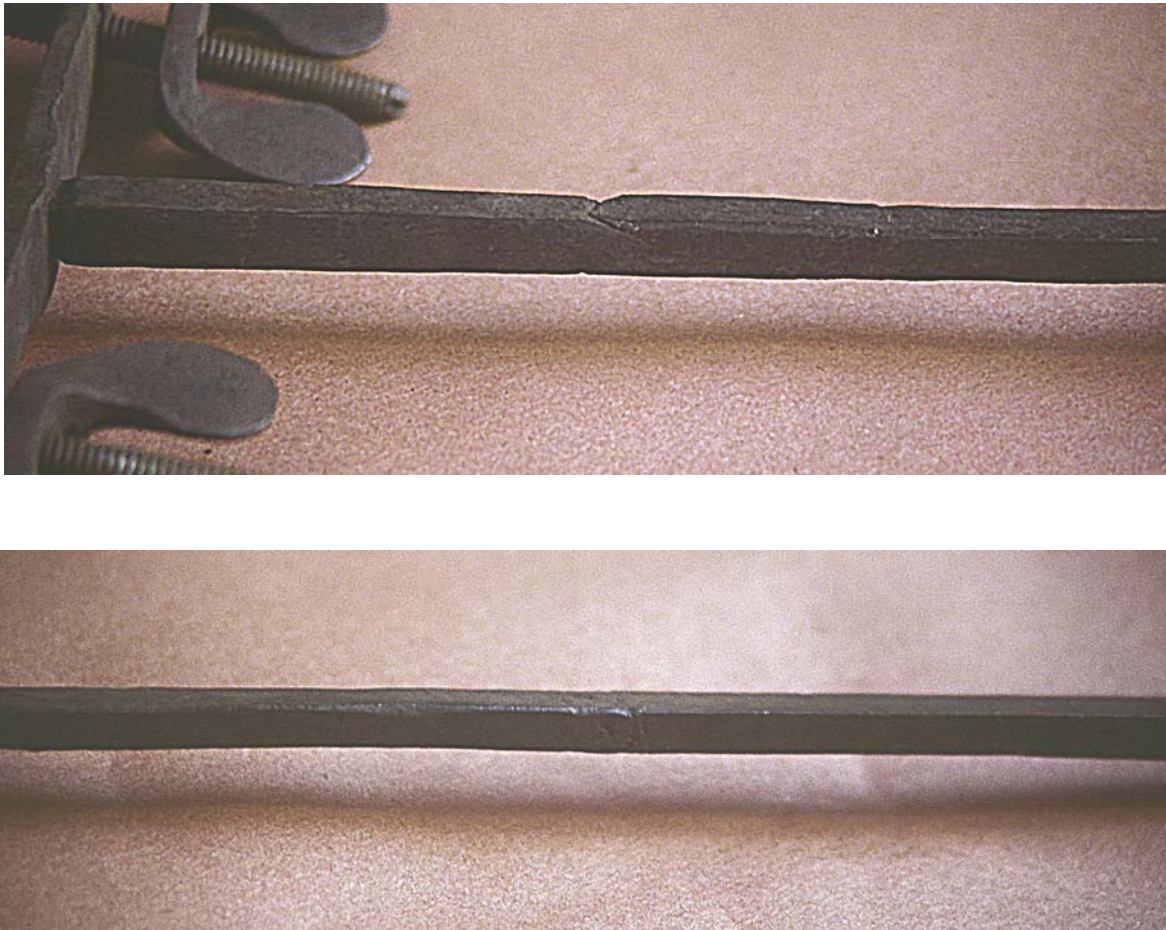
Existing welds on the pendulum rod: An older forge weld (top) and a 20th Century electric arc weld (bottom).
